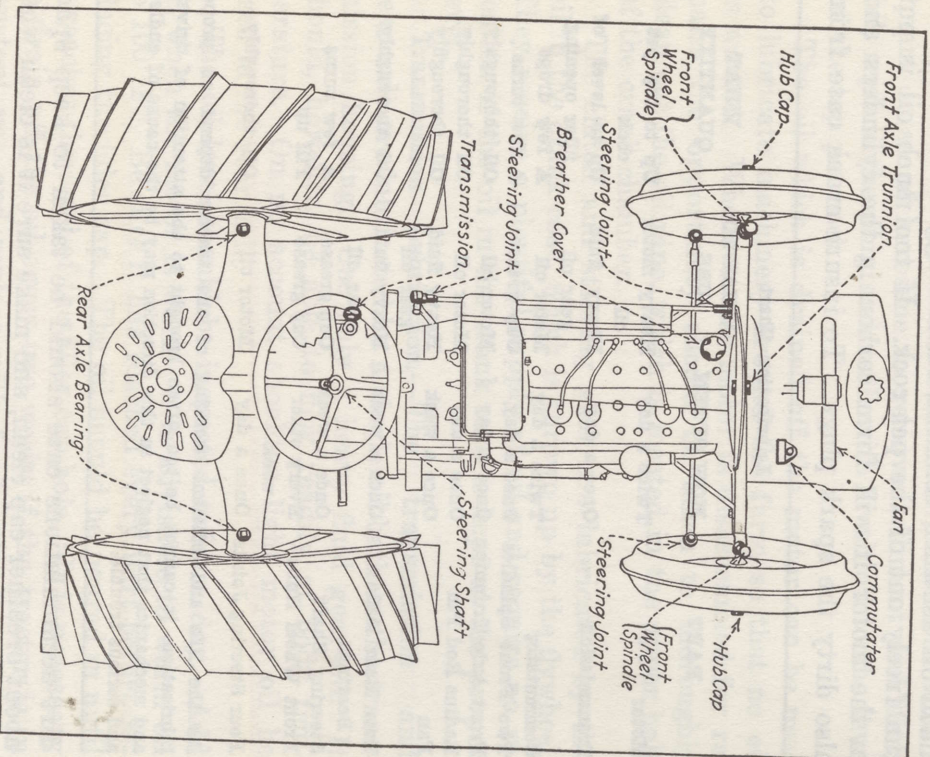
Plan View of the Fordson Tractor Showing Points That Demand Periodical Lubrication.
